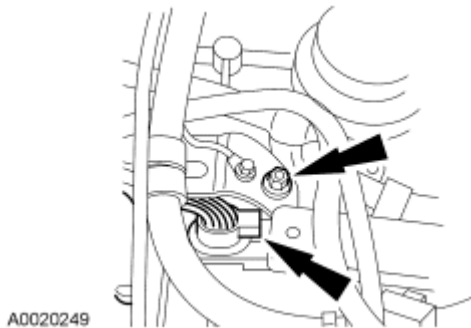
Locating Wire Harness Bracket Nut & Plug
